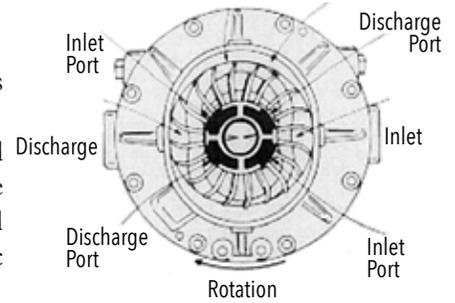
Liquid-Sealed Rotary Compressor, Double Lobe
